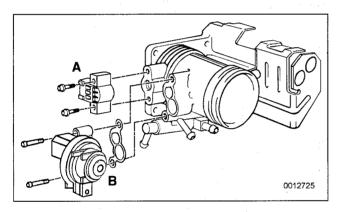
M44 engine: Throttle housing showing (A) throttle position sensor (TPS) and (B) idle speed control valve.
